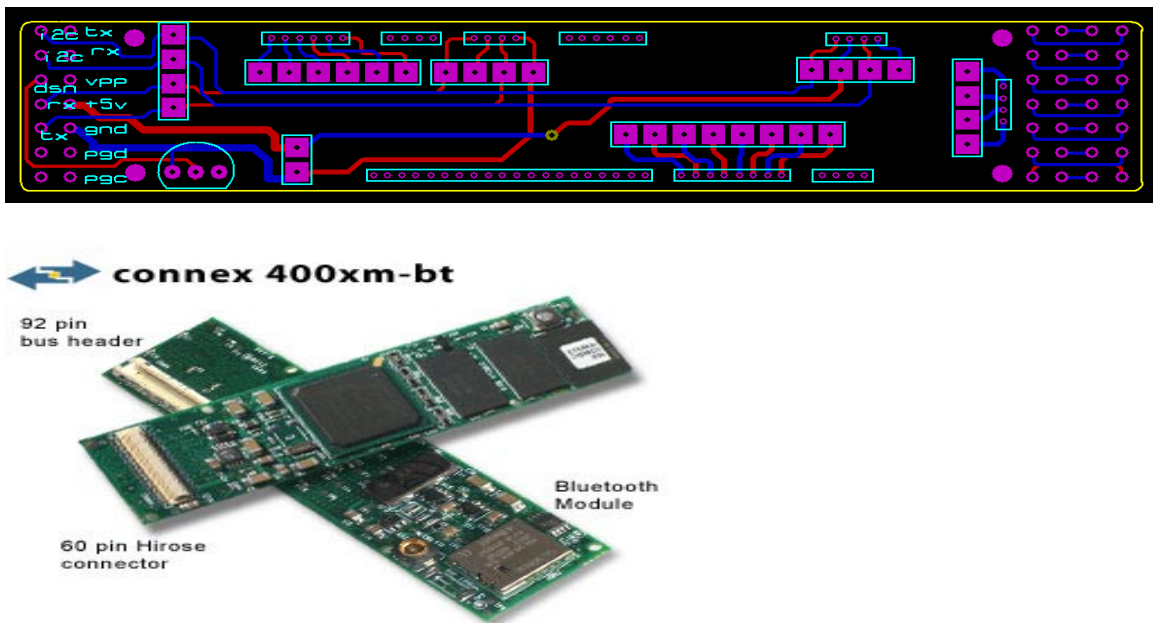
PCB layouts of Bluetooth blade and implemented Bluetooth communication blade
